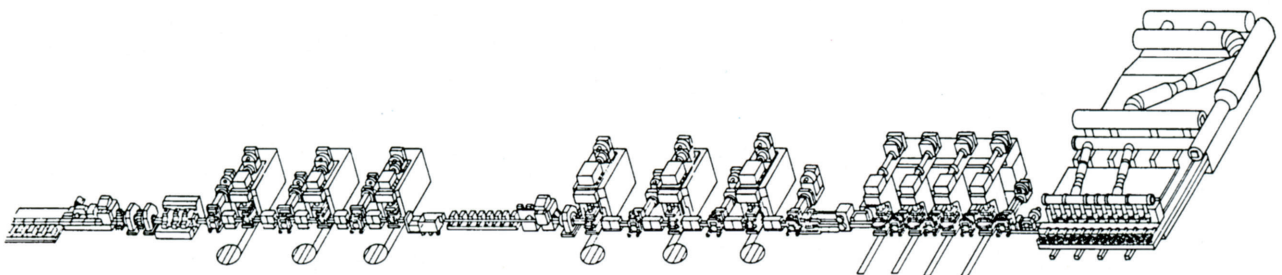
Layout of No.2 bar and wire rod mill of Sanyo Special Steel.
